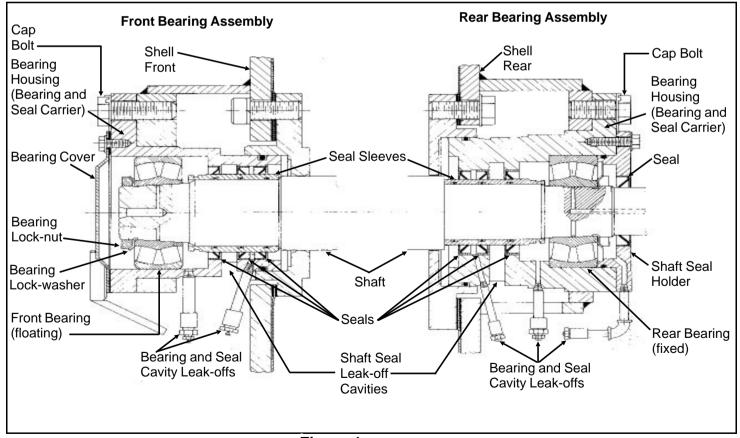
(MSSM0303AE) Cross Section View of Front and Rear Bearing Assemblies (Bearing Assembly for 60" and 72" WED Shown. Others similar.) Access to the bearings and seals for lubrication is provided by the various grease passages. Excess lubricant is excreted through the bearing and seal cavity leak-offs as shown on FIGURE 1. The bearings and seals must be lubricated regularly and the leak-off cavities flushed out periodically through the plugged cleanout connections, in strict accordance with the preventive maintenance procedures elsewhere.
